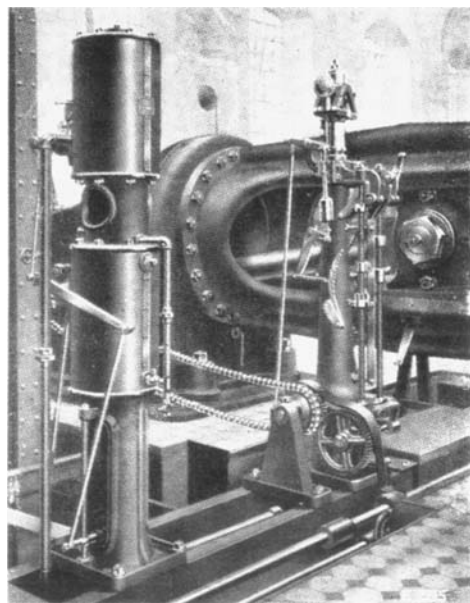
Standard Whitmore Brake Engine and Overwinder connected to a Corliss Compound Winding Engine by Roller Chain.
